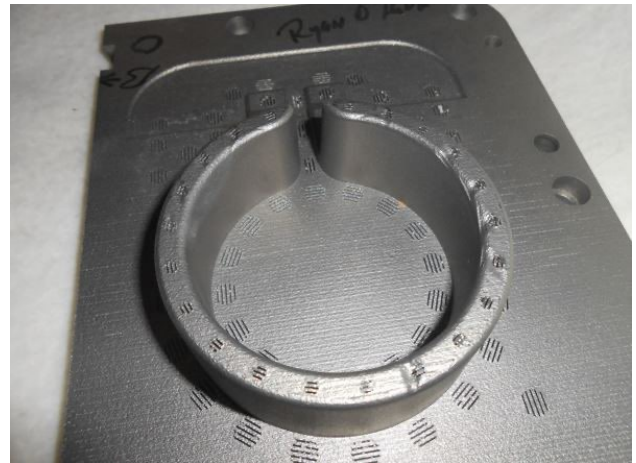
Print artifact on Ti mold requiring weld repair.
